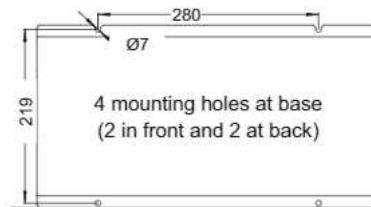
Positions and dimensions of the mounting holes at the base (in mm)
